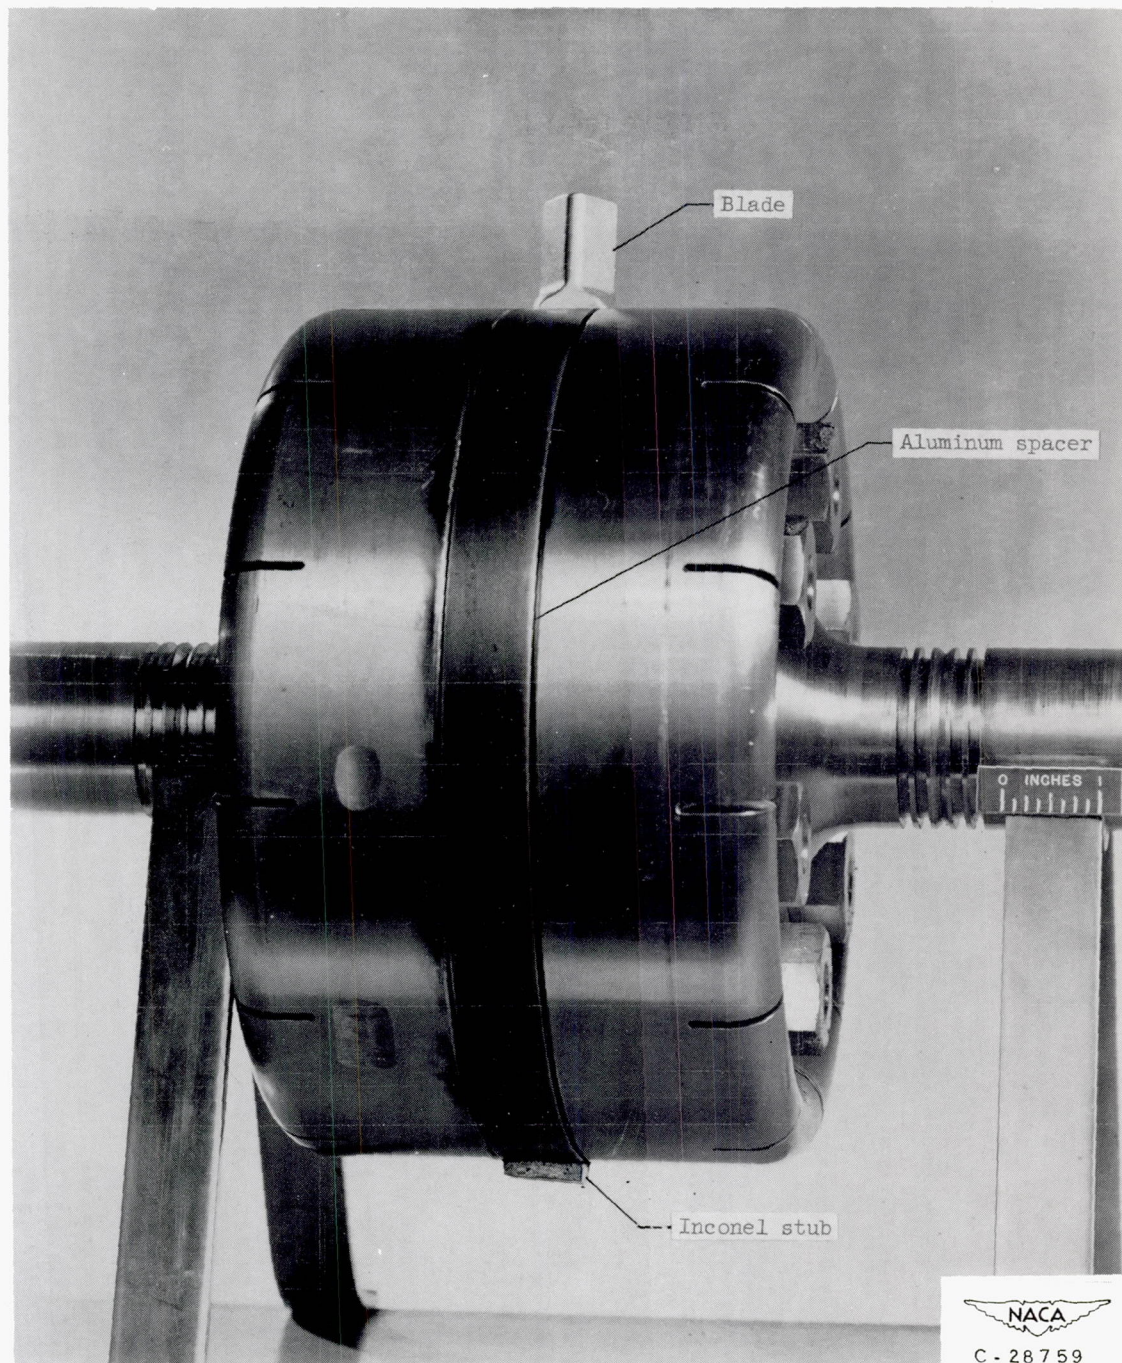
Rotor assembly with one molybdenum disilicide blade, an Inconel blade stub, and two aluminum spacers.
